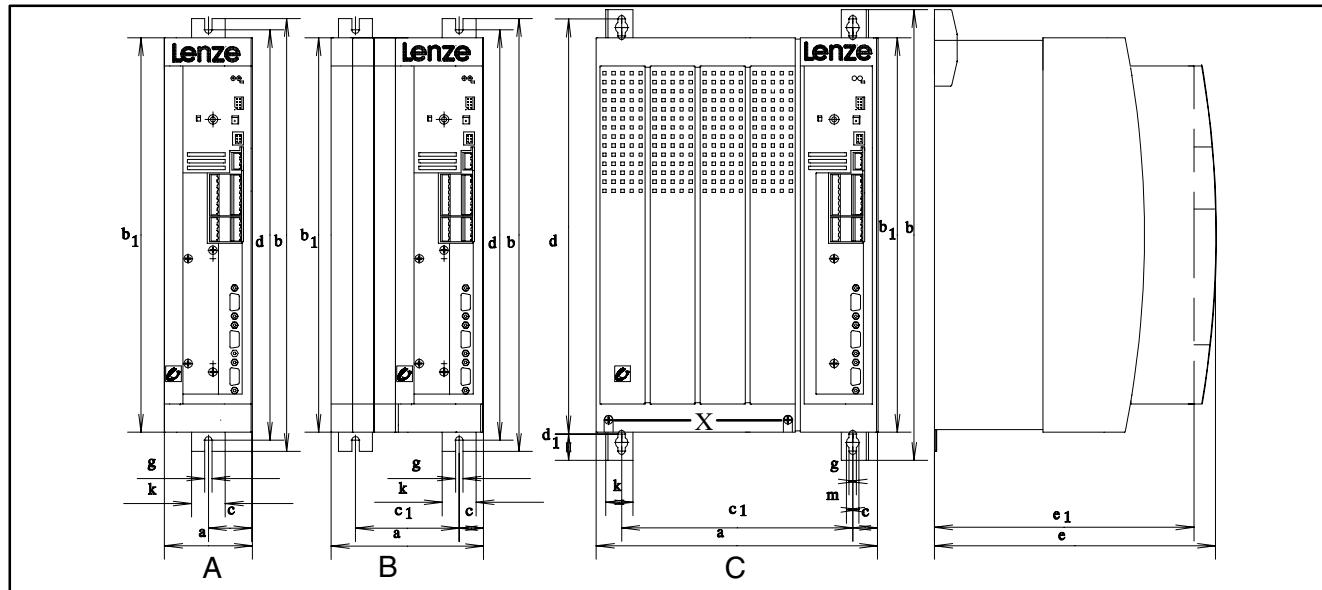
Dimensions for assembly with fixing rails / fixing brackets
